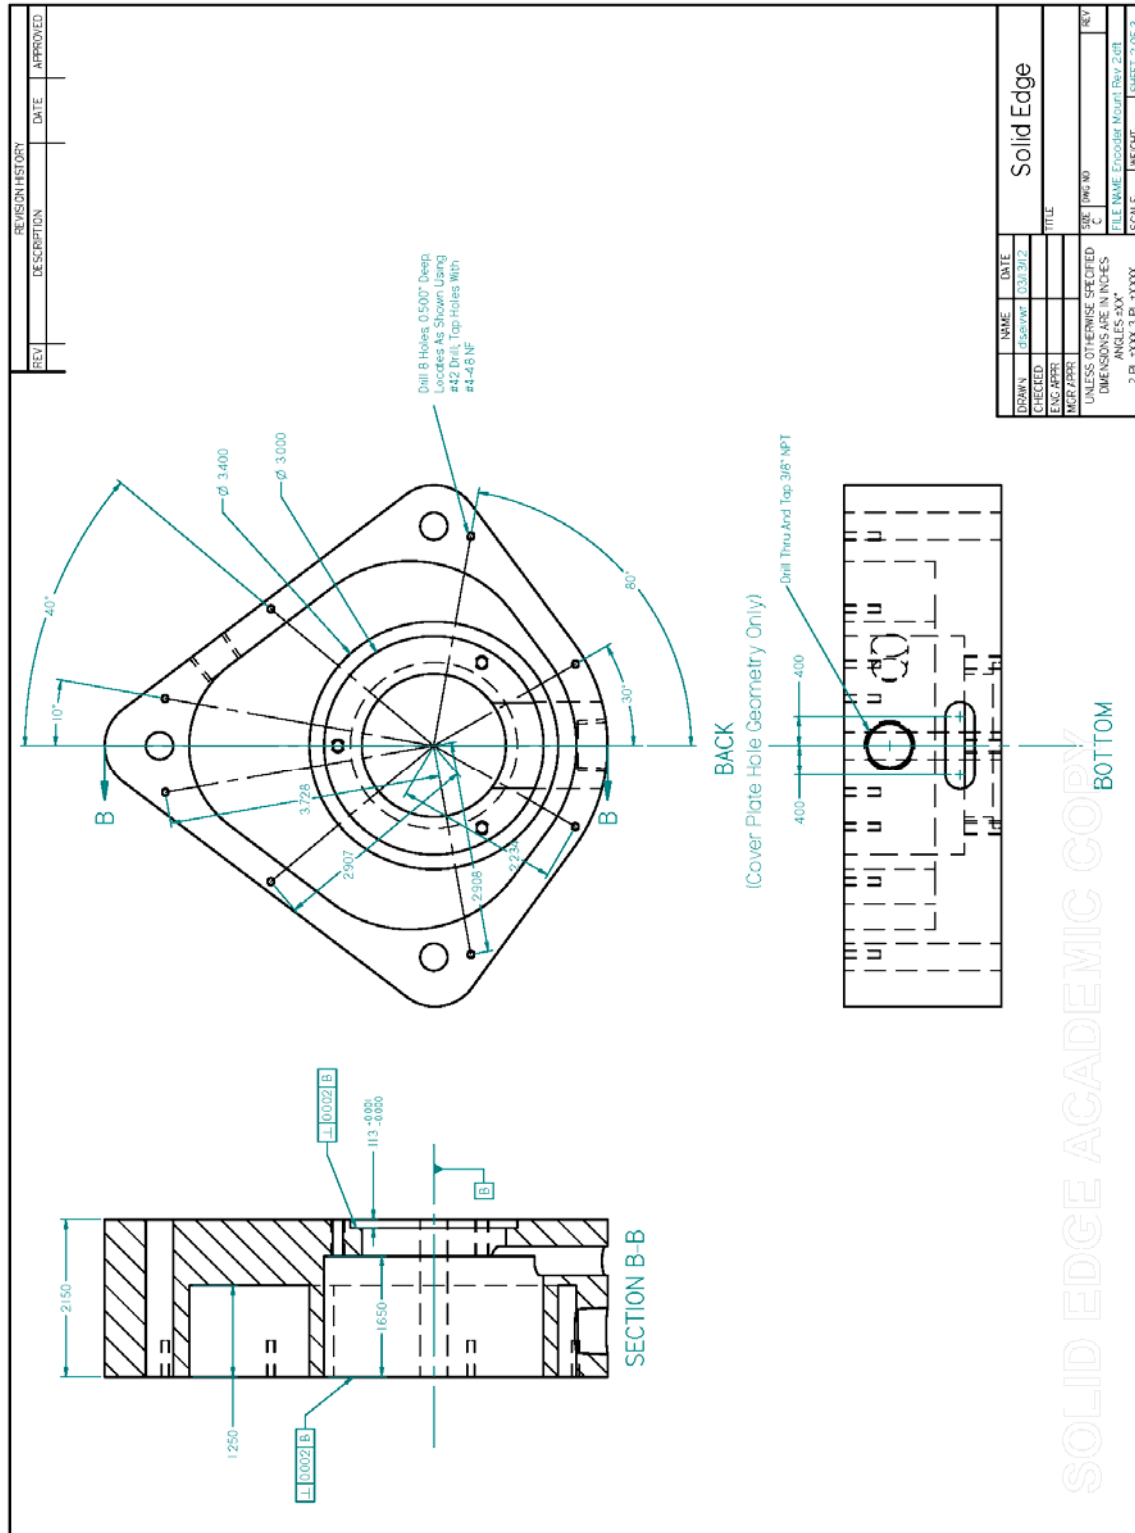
Engineering Drawing of Optical Encoder Mount Back
